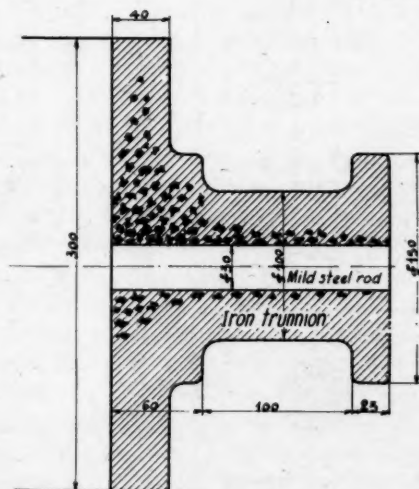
SHOWING POROUS CONDITION OF CASTING WHEN STEEL RODS ARE USED FOR REINFORCEMENT
